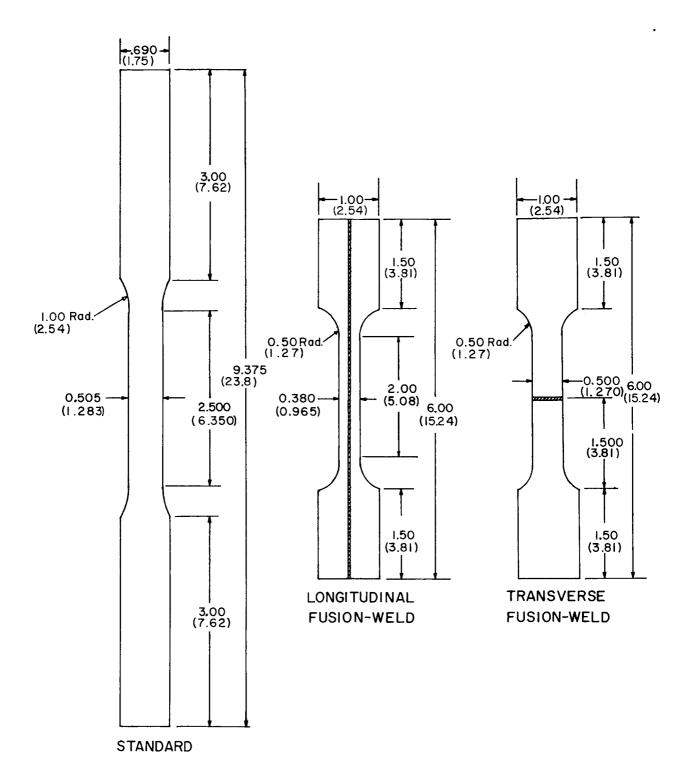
Tensile specimens. All dimensions are in inches (centimeters).
